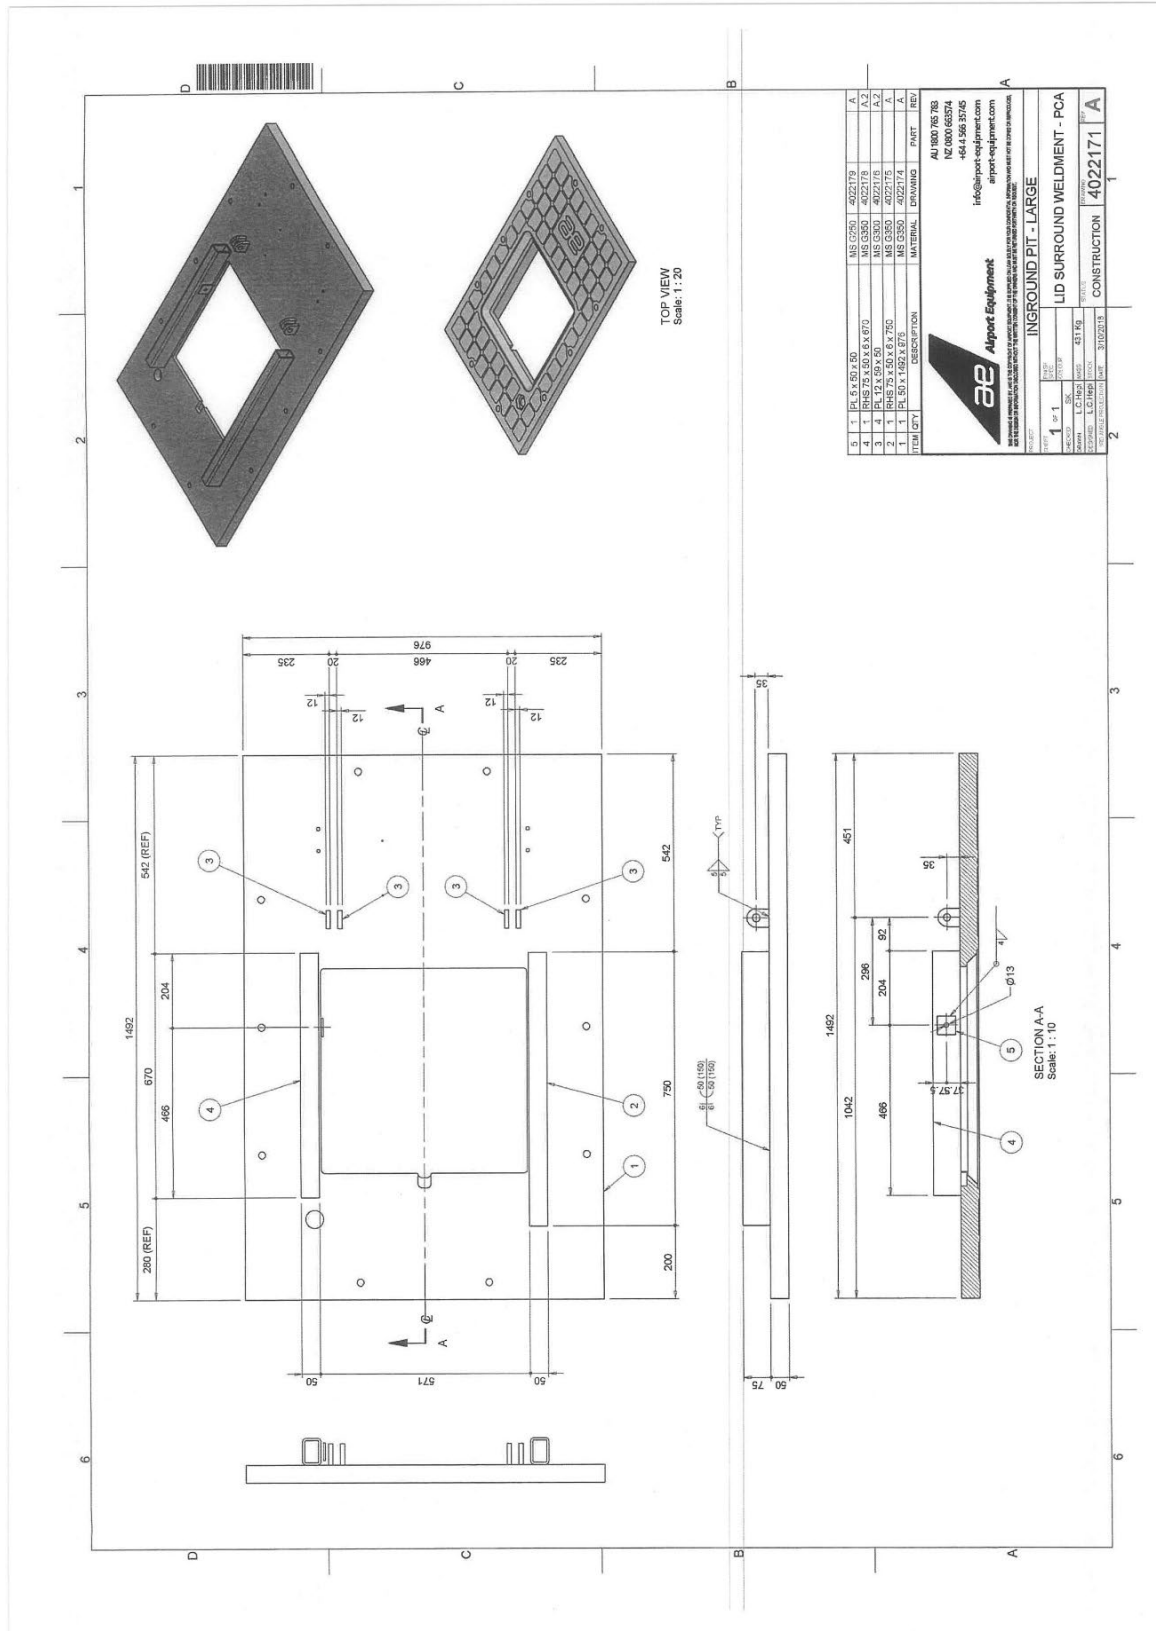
Pit lid assembly (Drawing number 4022171 Sheet 1 of 1) (Drawing supplied by the client)
